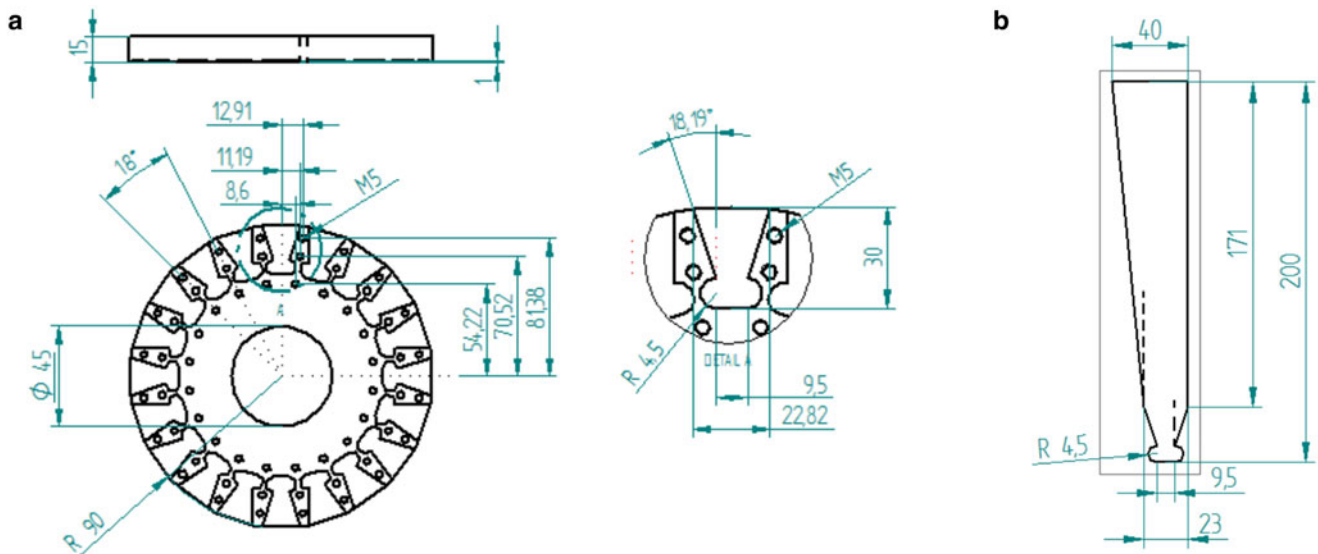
Geometrical dimension of the mounting hub in (a) and blade in (b)
